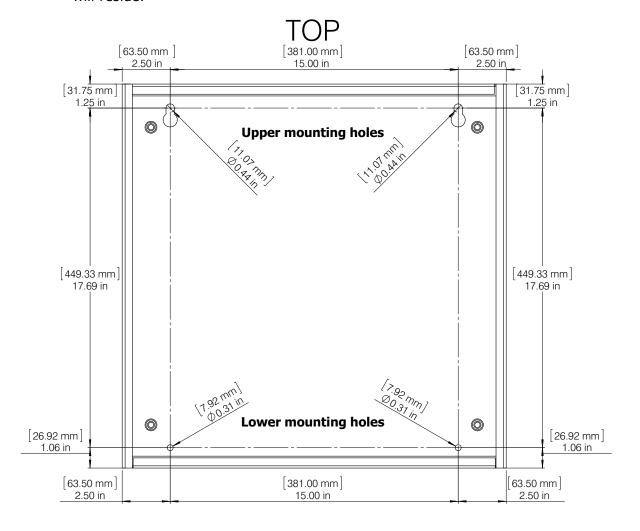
NEMA 1 Mounting Hole Locations and Dimensions
